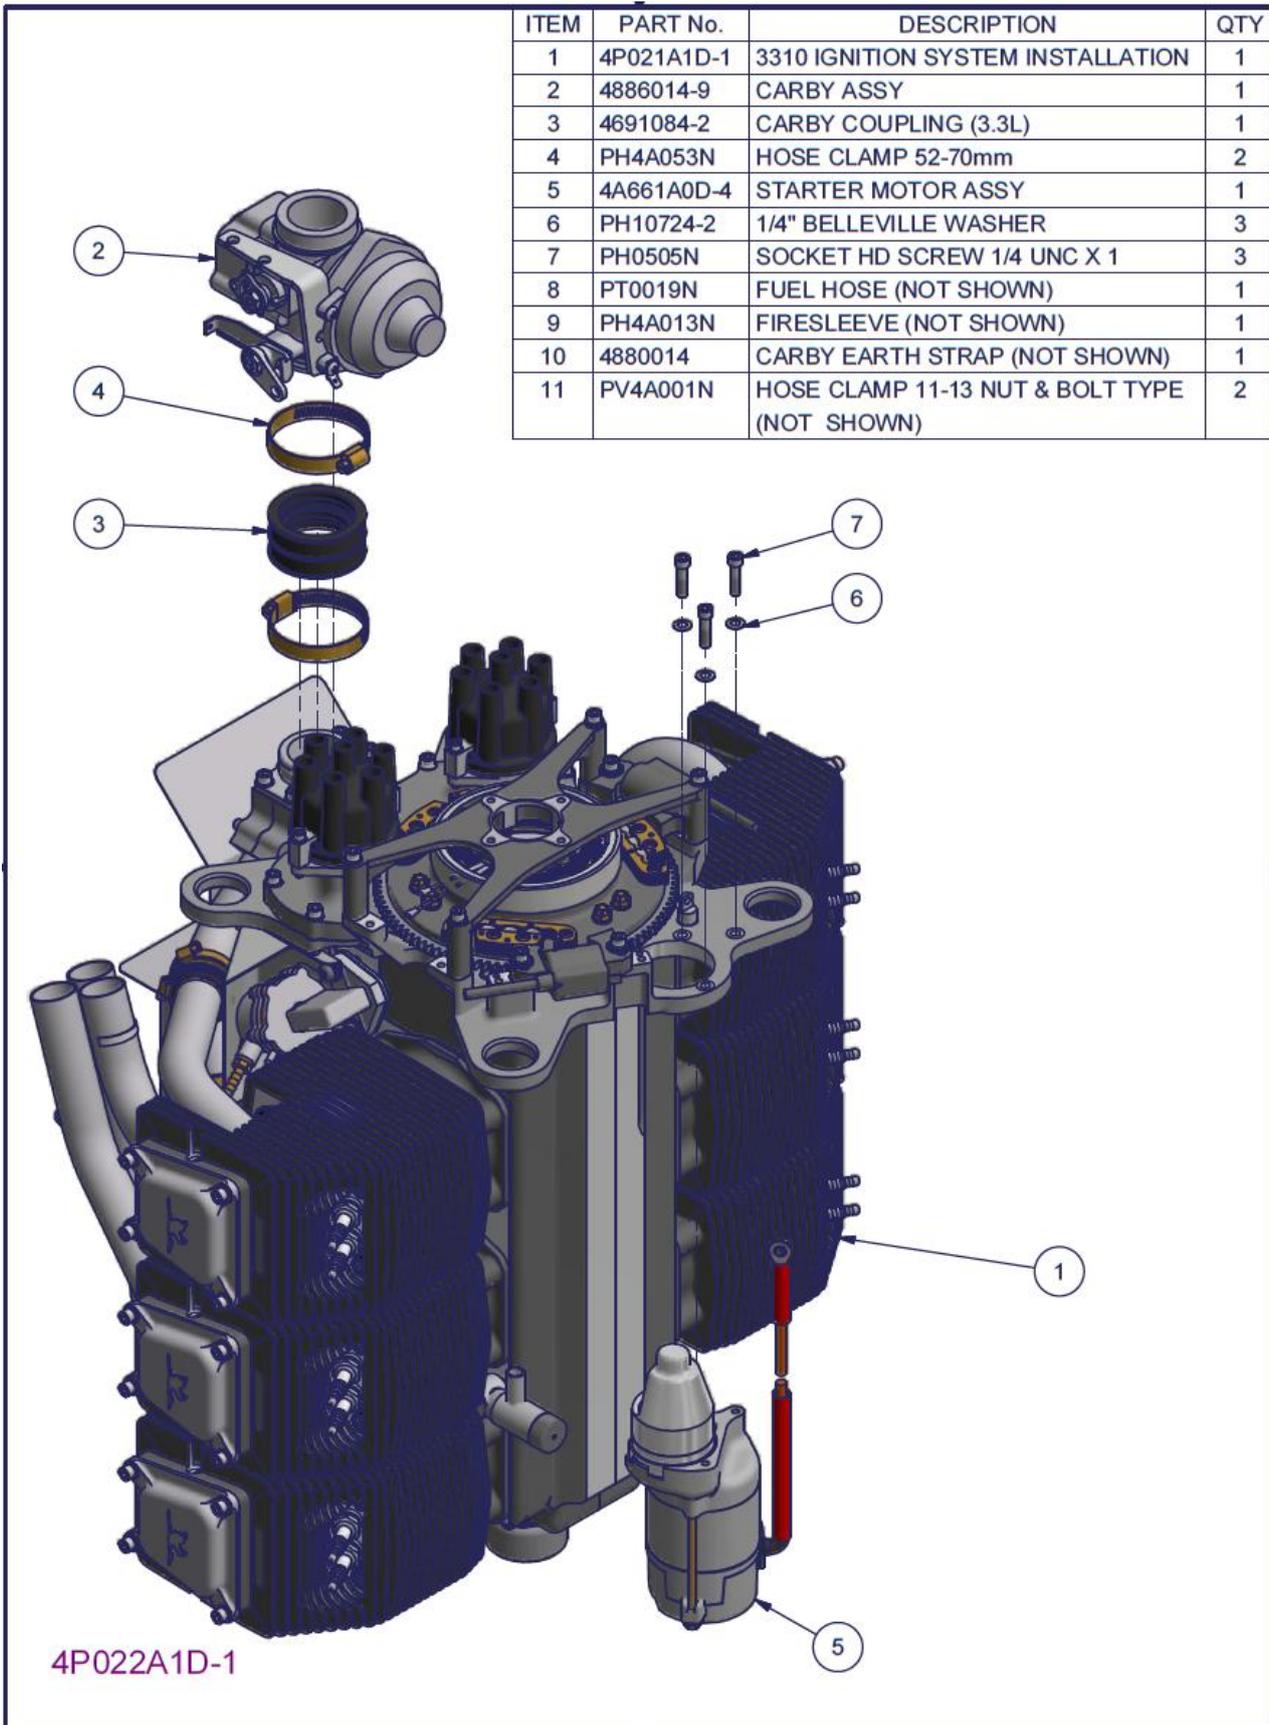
3300 Carburettor and Starter installation – Parts List
